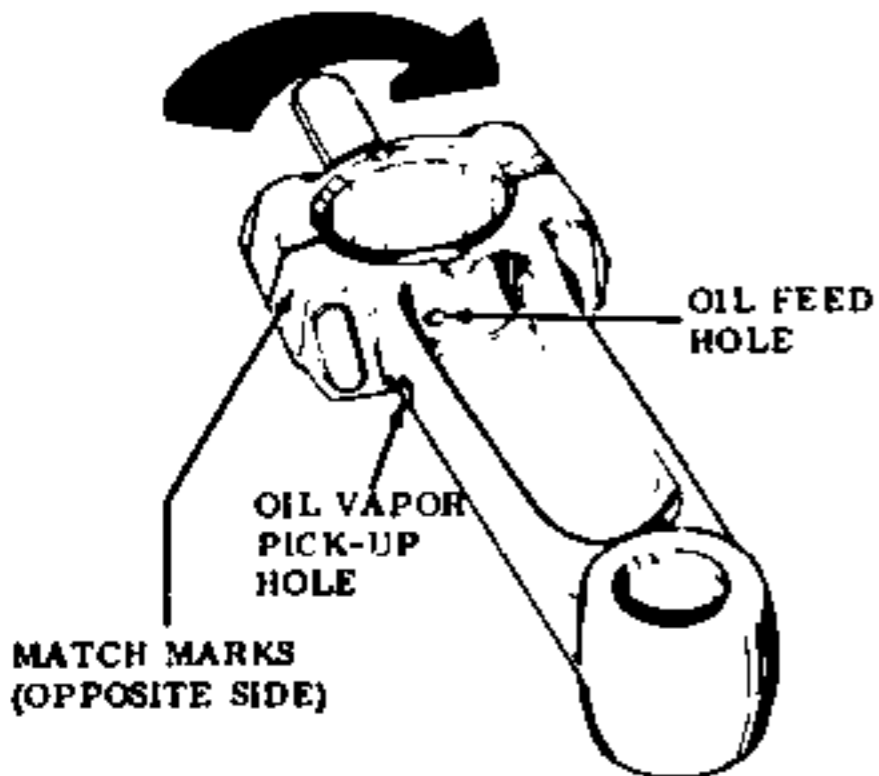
Connecting rods used on Models VH80 and VH100 have two oil holes.
